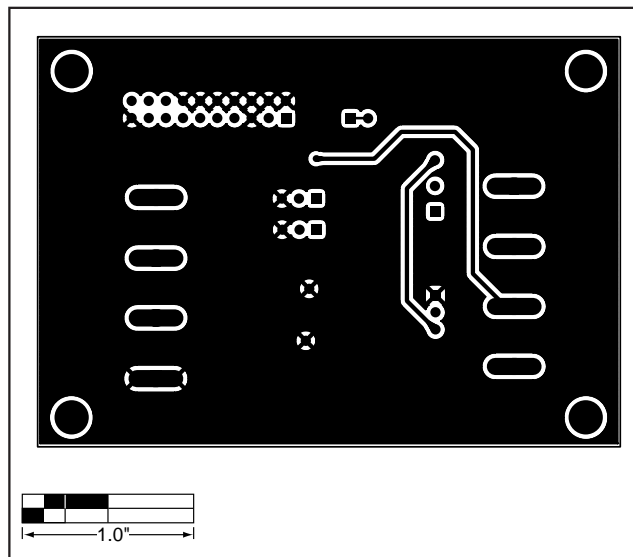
MAX1618 EV Kit PC Board Layout—Solder Side
